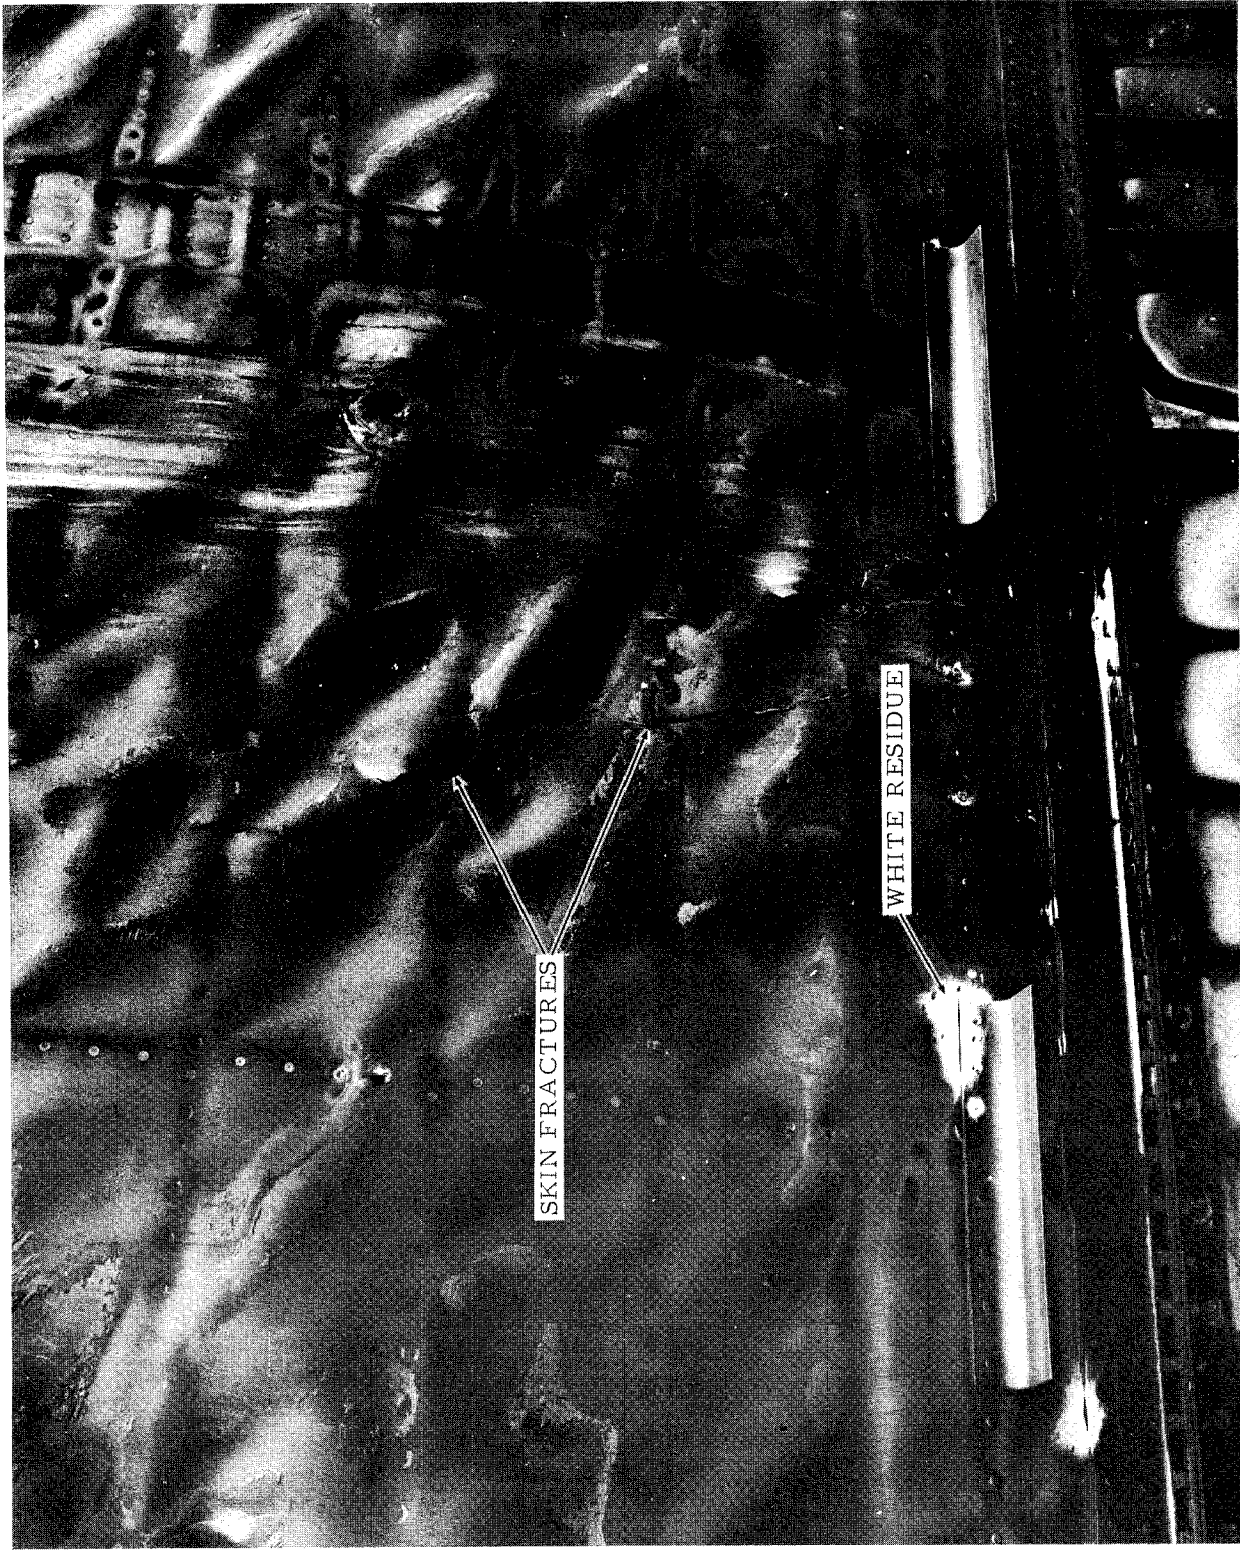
SKIN FRACTURES NEAR LOWER AFT END
